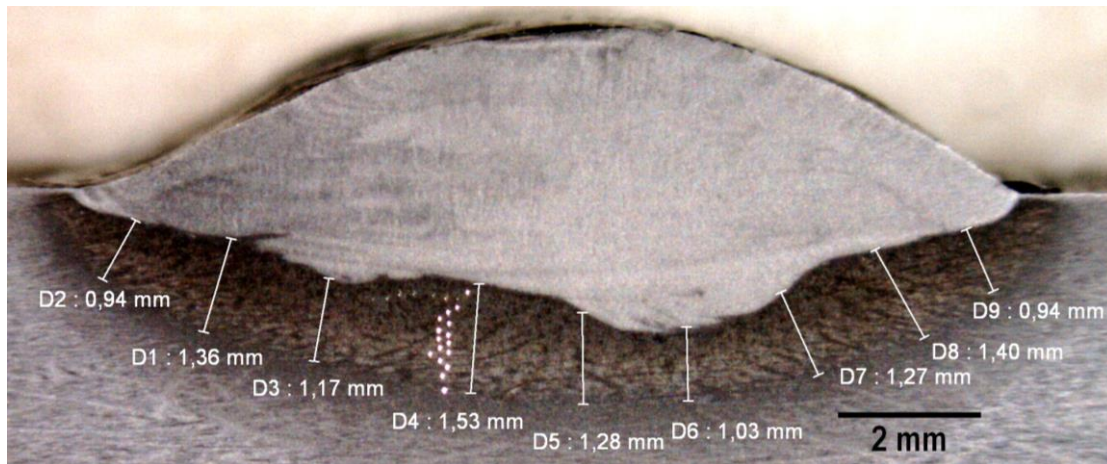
Macroscopic view (transversal section) of the weld bead deposited onto a 42CrMo4-700 steel plate.
